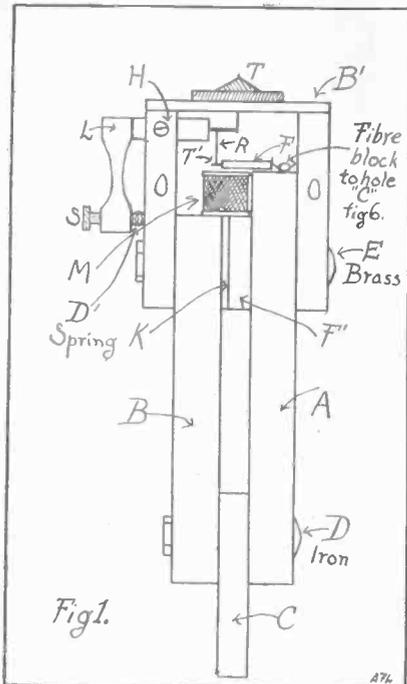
A WORKING drawing of the complete relay each part lettered for ease of assembly. Care should be taken that all parts are screwed together tightly so that there will be no chance for weakened magnetic currents.
